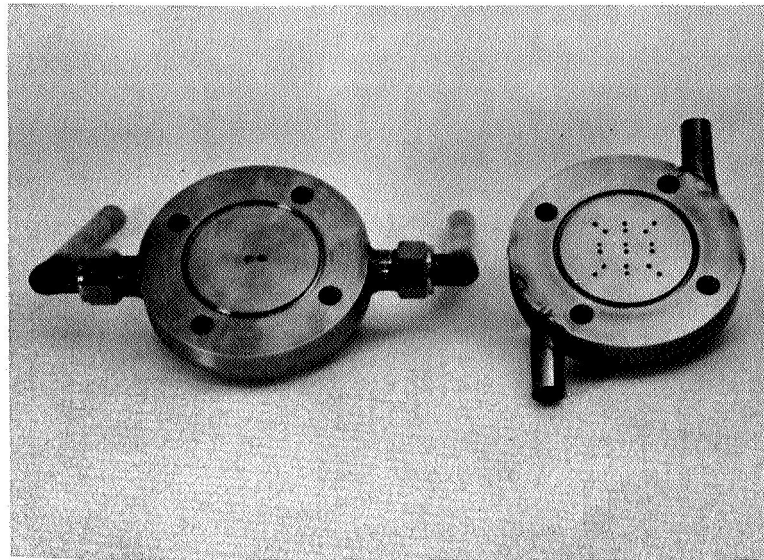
Water Flow Check - Valve and 9 Pair Doublet Injector (Drilled Inserts Installed)
